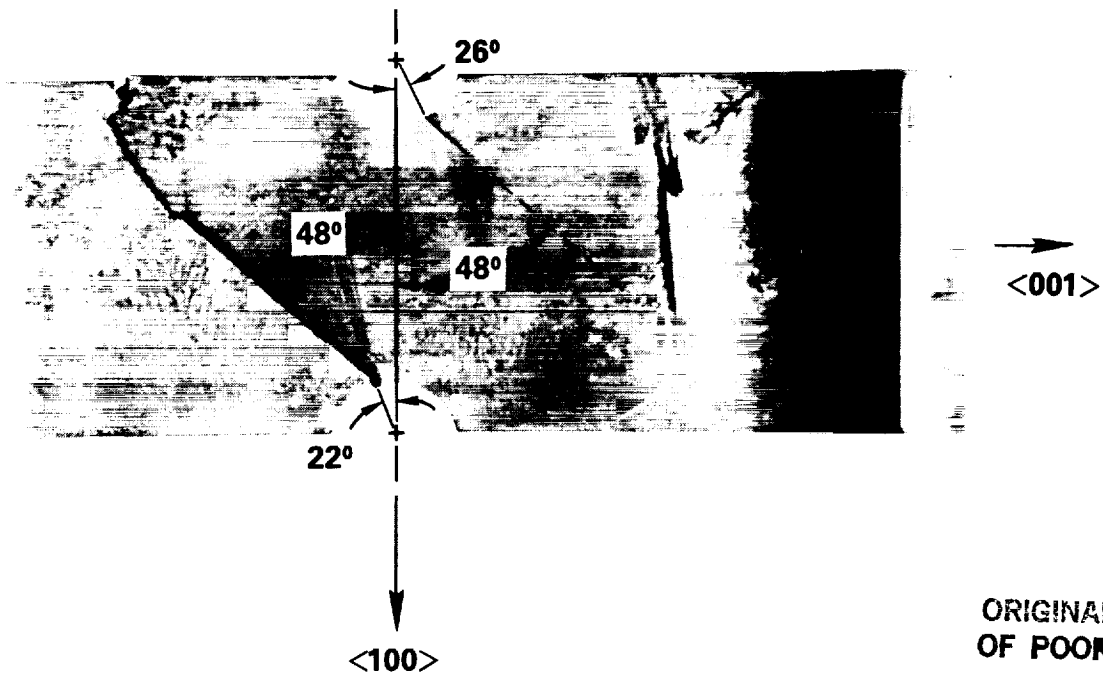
Fatigue cracks initiate at the maximum principal stress location with crack planes perpendicular to the principal stress. Cracks progress along $\langle 111 \rangle$ planes in the final stages of crack growth.
